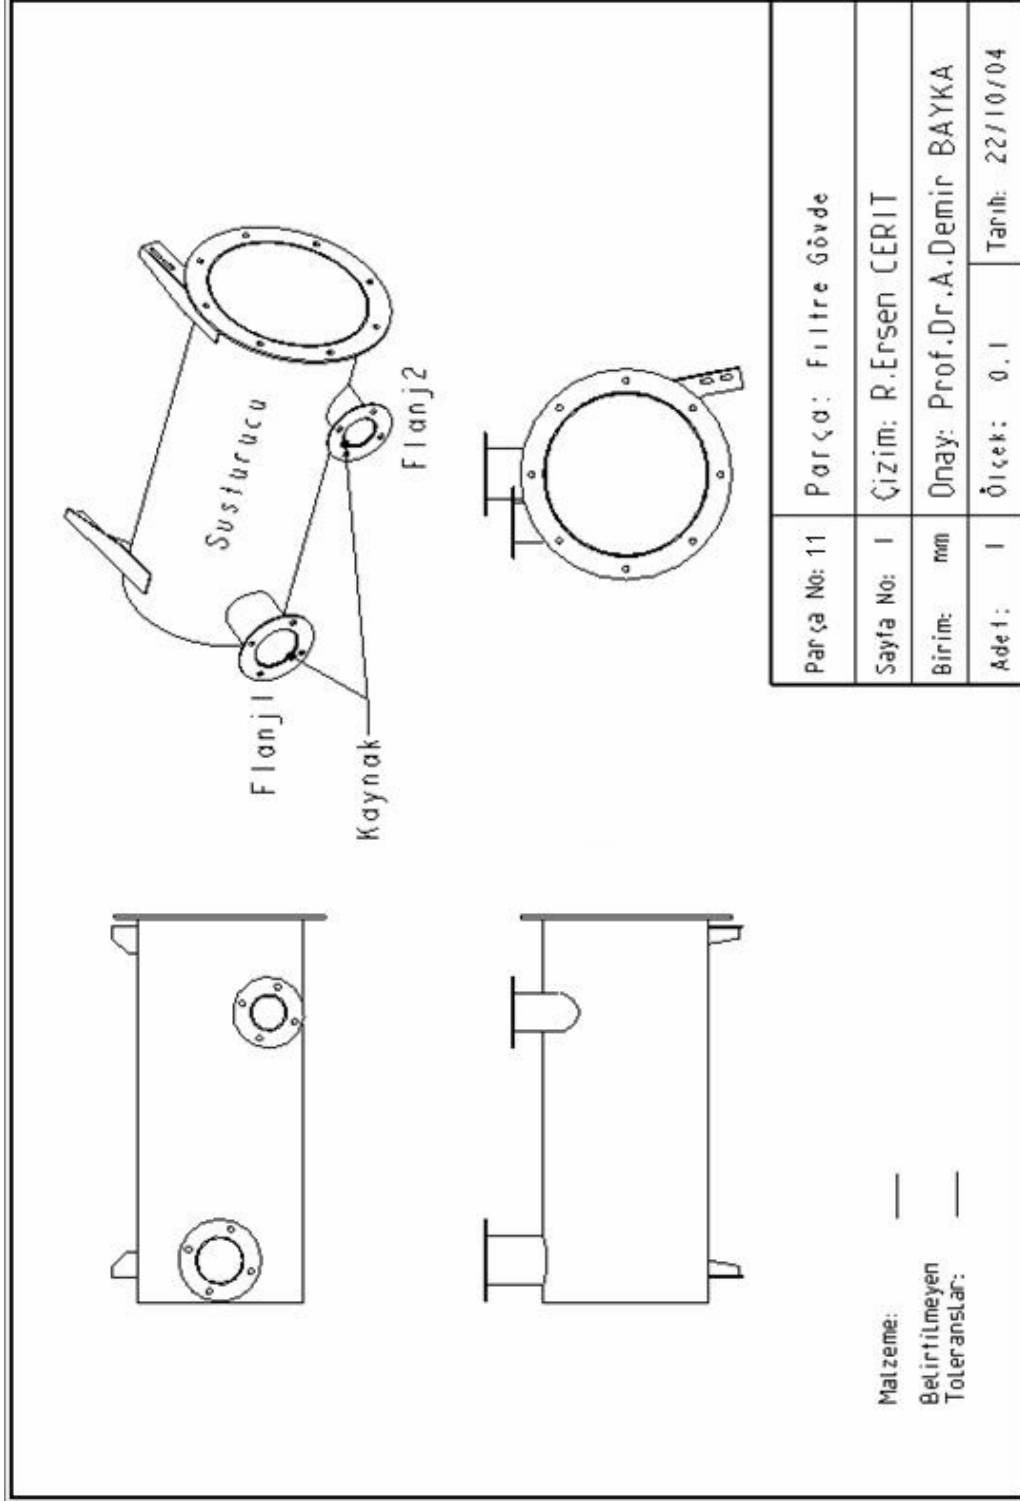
Technical Drawing of Welded Silencer with Flanges.
